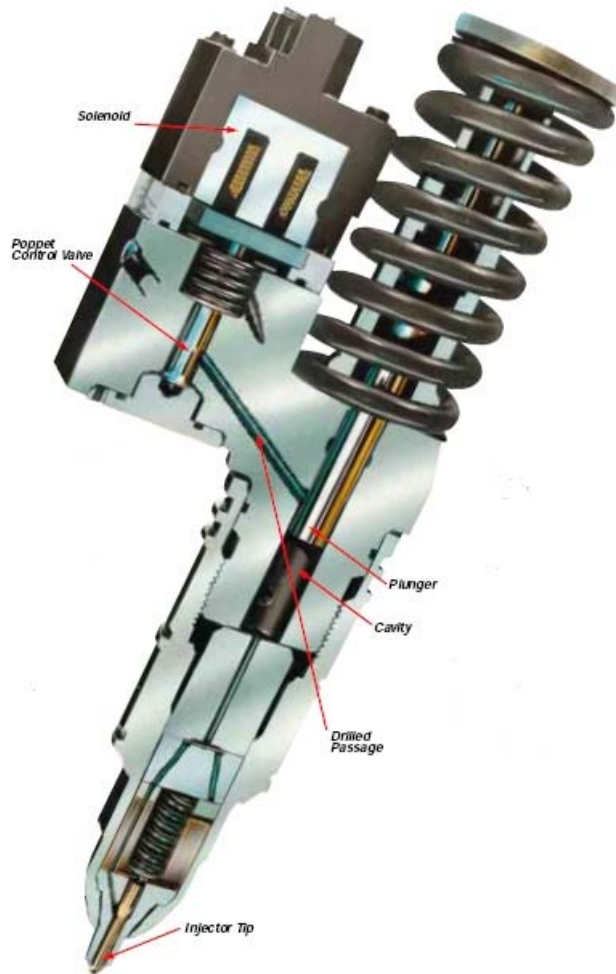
Cut-Away of the DDC Fuel Injector Assembly Showing Poppet Control Valve Location.
